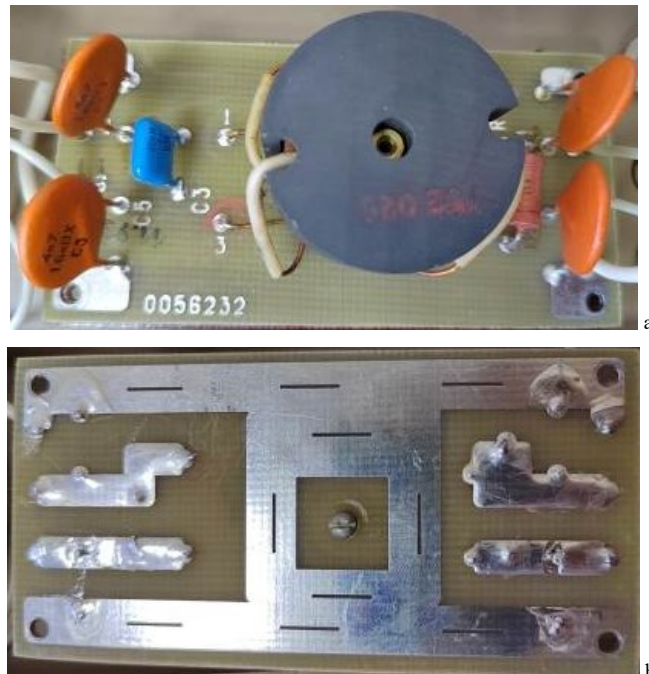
EMI filter: (a) TOP and (b) BOTTOM views of the PCB.
